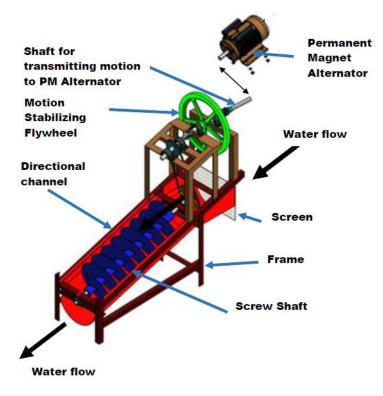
Exploded view of Screw Shaft Flywheel Stabilizing Hydro Turbine with PM Alternator
